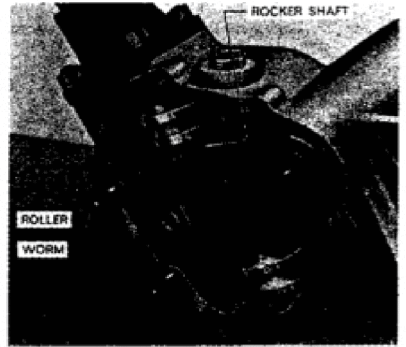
View of steering gear assembly with side cover removed. Roller moves in slot in side cover.
